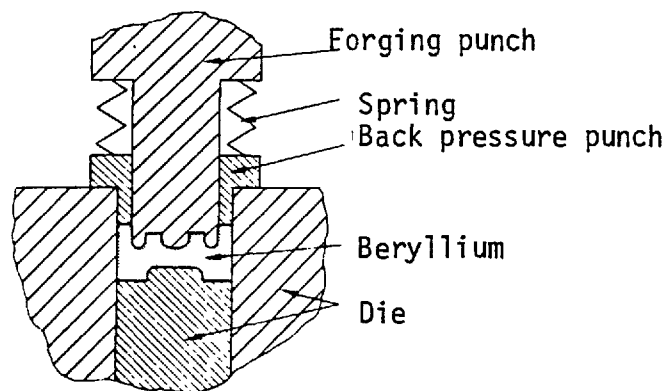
Illustration A. Spring loaded forging of beryllium (Hayes and Yoblin⁹³).
